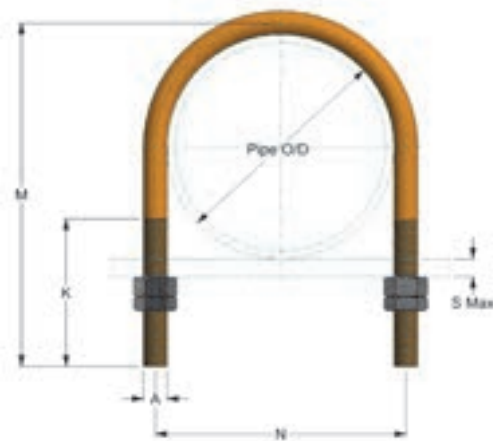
Gripping U-Bolt (Steel Pipes)
